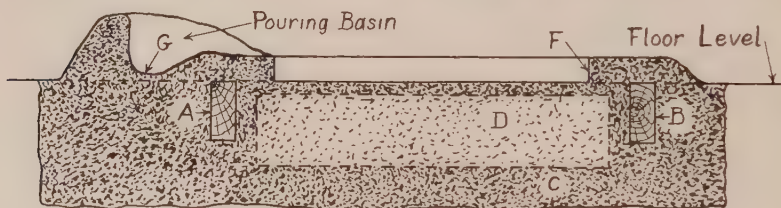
Casting "Open Sand" Plates on a Soft Bed.
